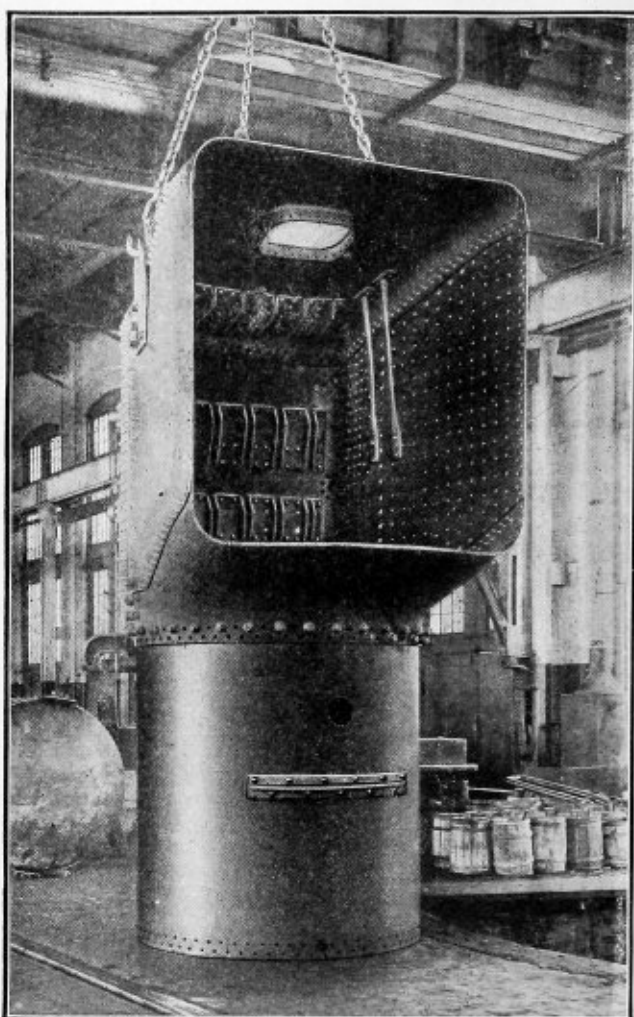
INTERIOR VIEW OF PARTLY FINISHED BOILER.
